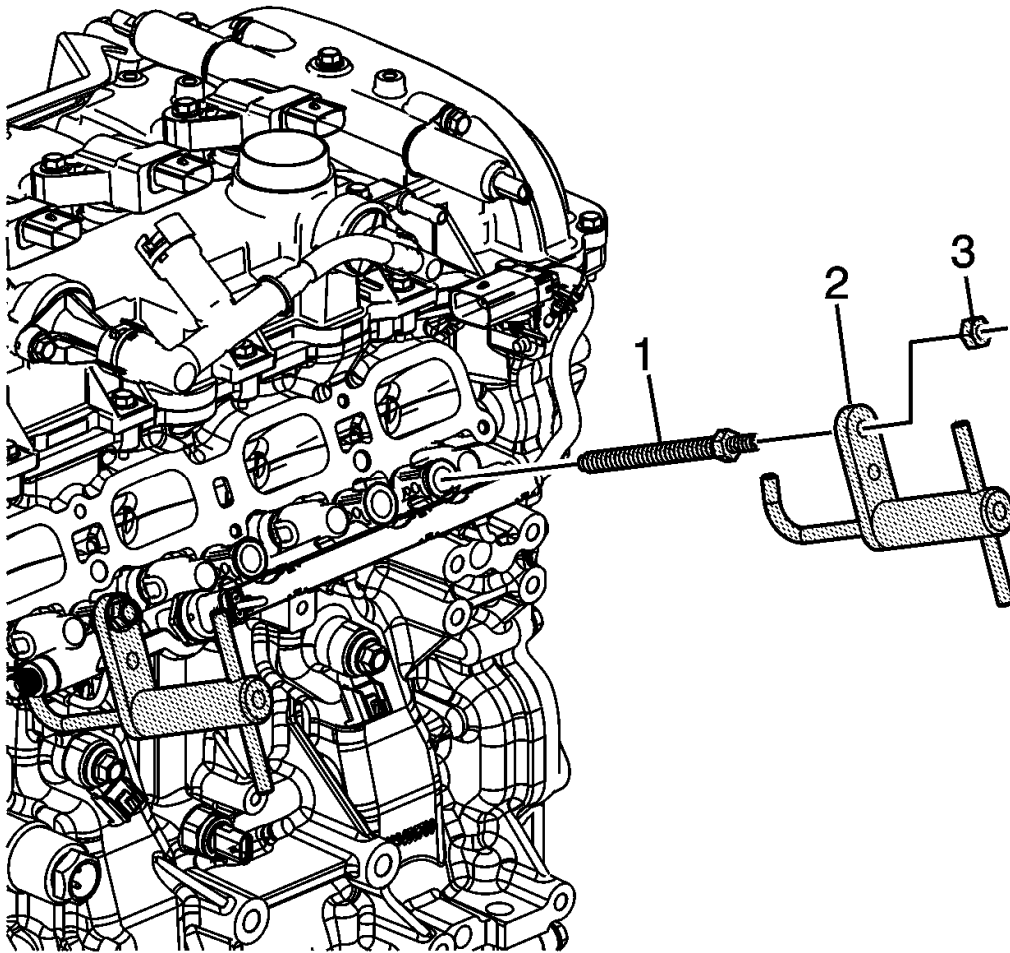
Identifying Fuel Rail Assembly Remover Studs
